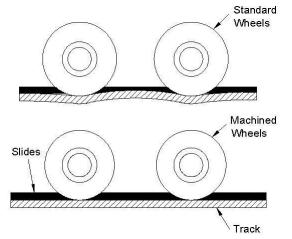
Friction caused on the slides due to the larger diameter of the wheels.
